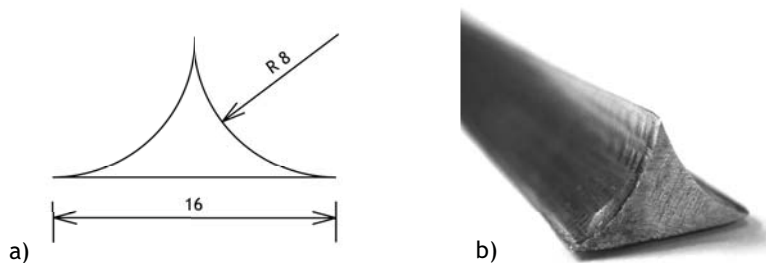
Auxiliary tool: a) Dimensions and geometry; b) Finished tool.
